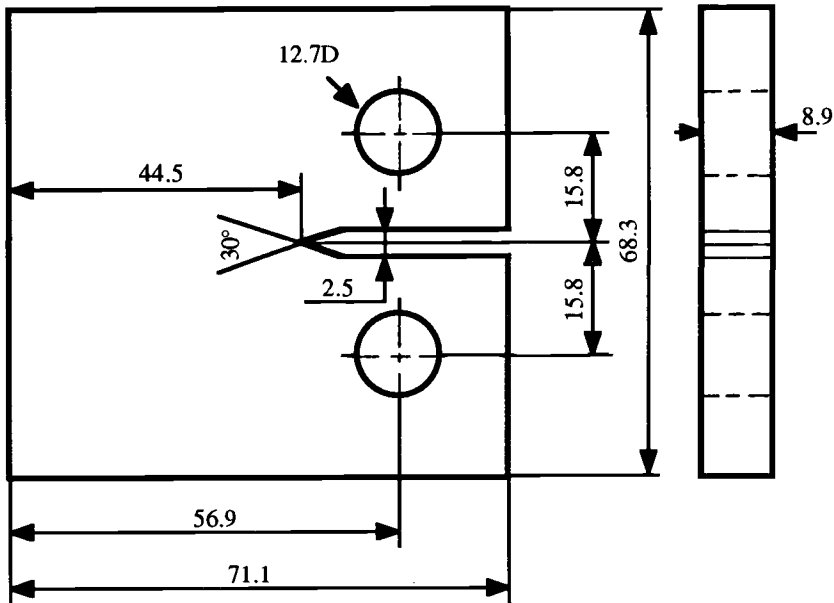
C(T) specimen for fatigue crack growth testing (all dimensions in millimetres).
